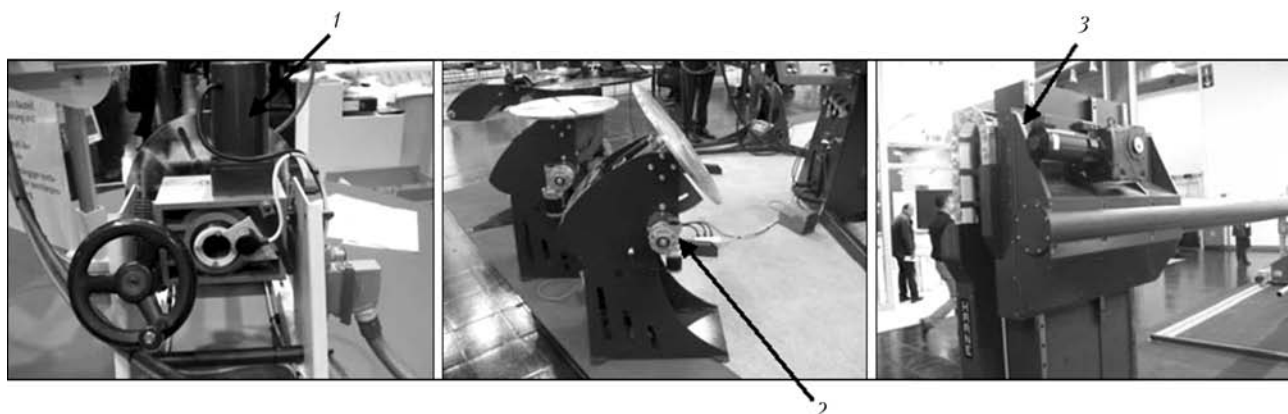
All-purpose manipulators with valve electric motors (1-3)
